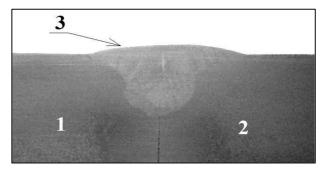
Macroscopic image of a butt weld cross-section (1 face, 2 tube, 3 weld)
